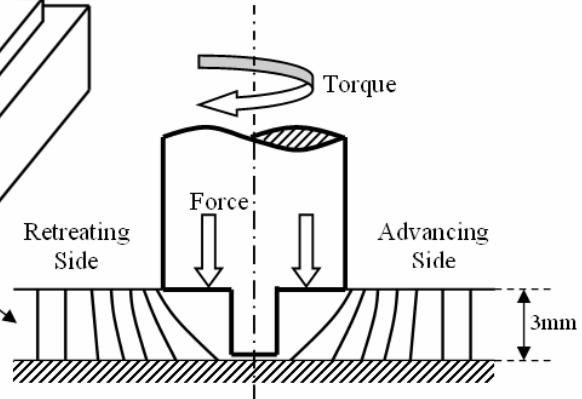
Cross section view of a simple tool geometry and plate with applied loads
